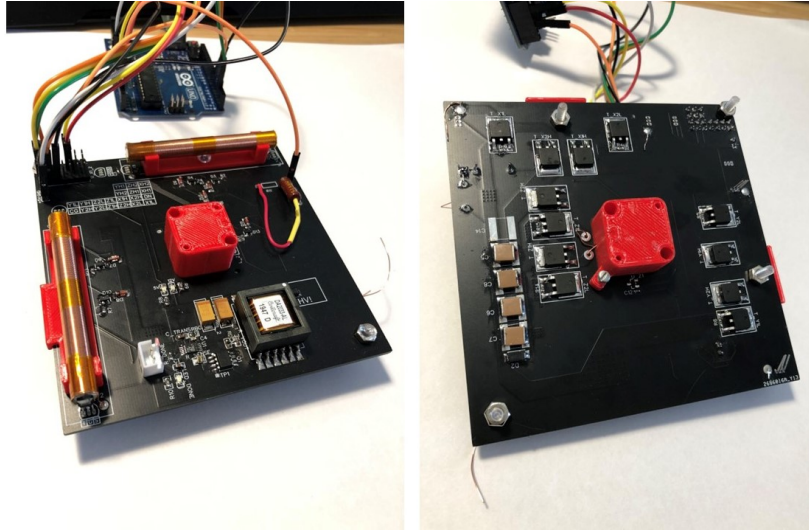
Prototype board of the EPM (left) top view, (right) bottom view.
